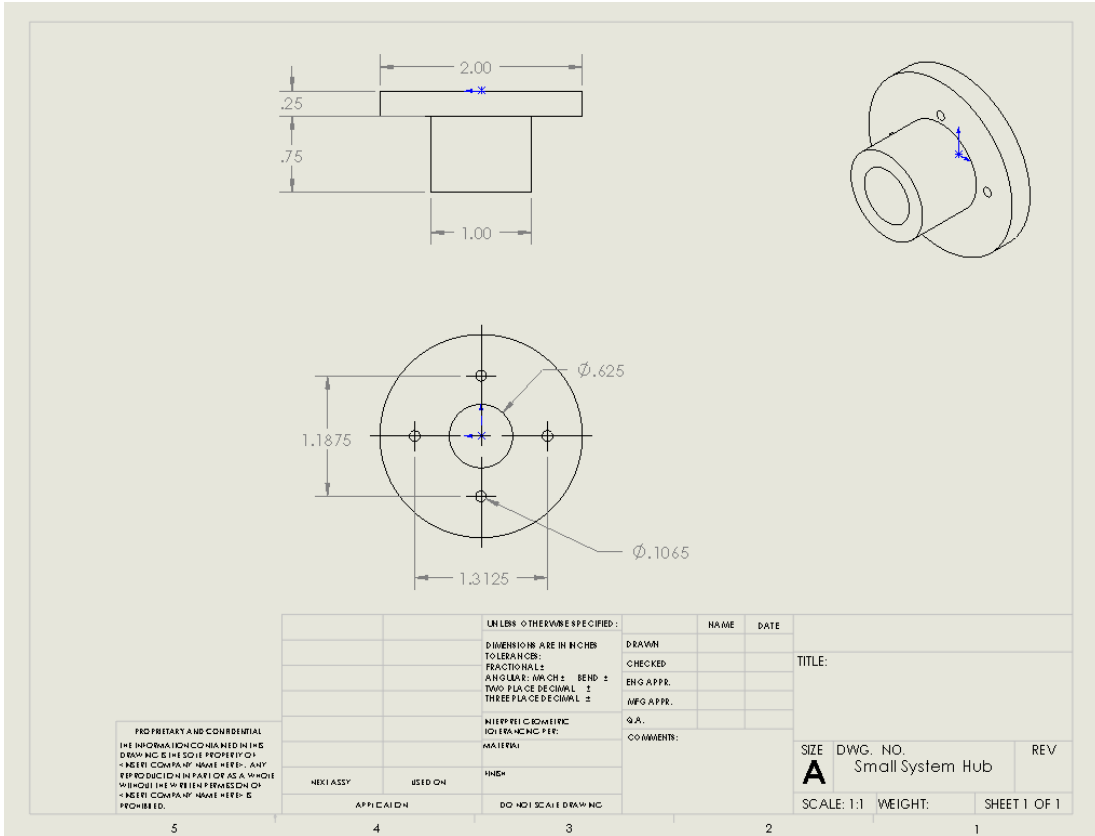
Hub Attaching Control Shaft to the Pendulum Wheel
